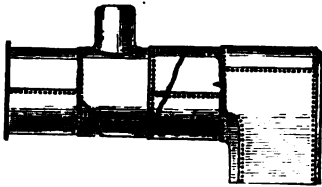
Explosion of a locomotive boiler from corrosive grooving.
